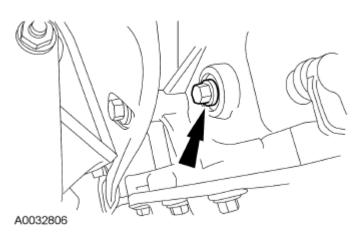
Locating Engine Plug Bolt Courtesy of FORD MOTOR CO.
